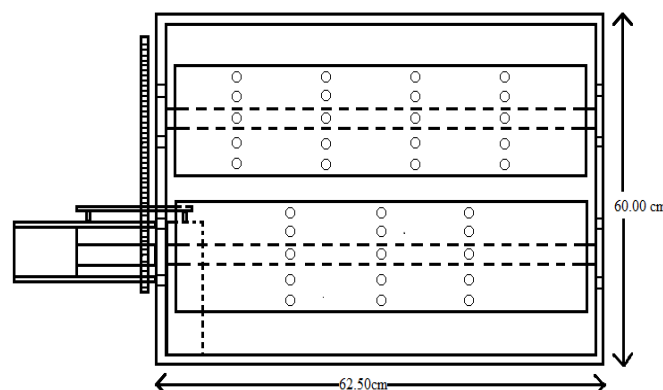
Top view of the Machine (AutoCAD Diagram)
